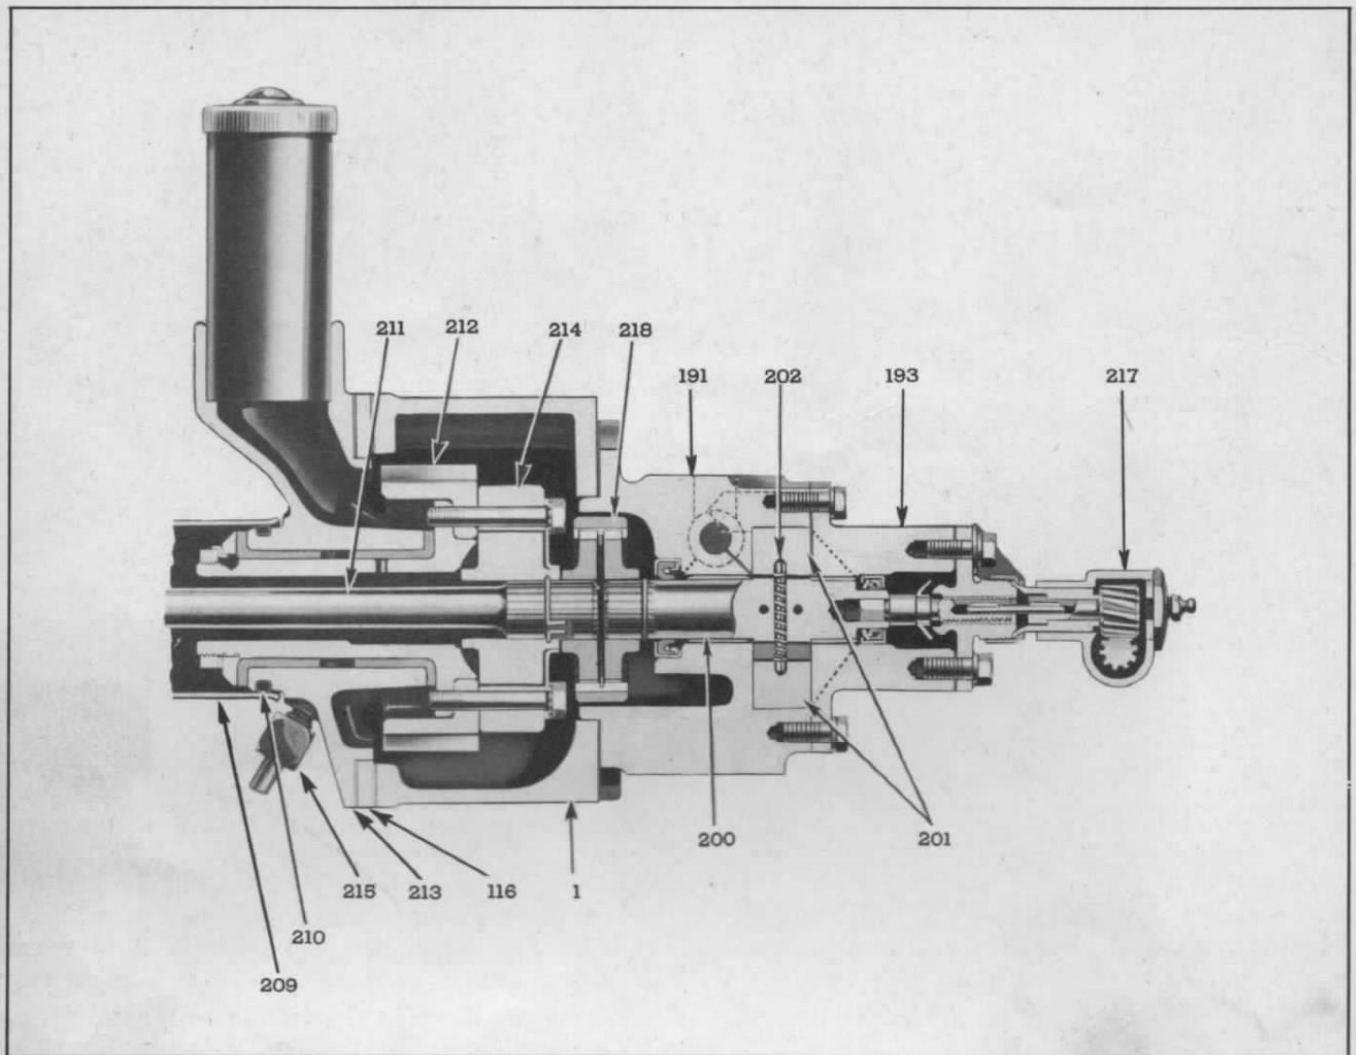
Hydraulic Marine Reverse Gear Oil Pump Mounting and Drive
